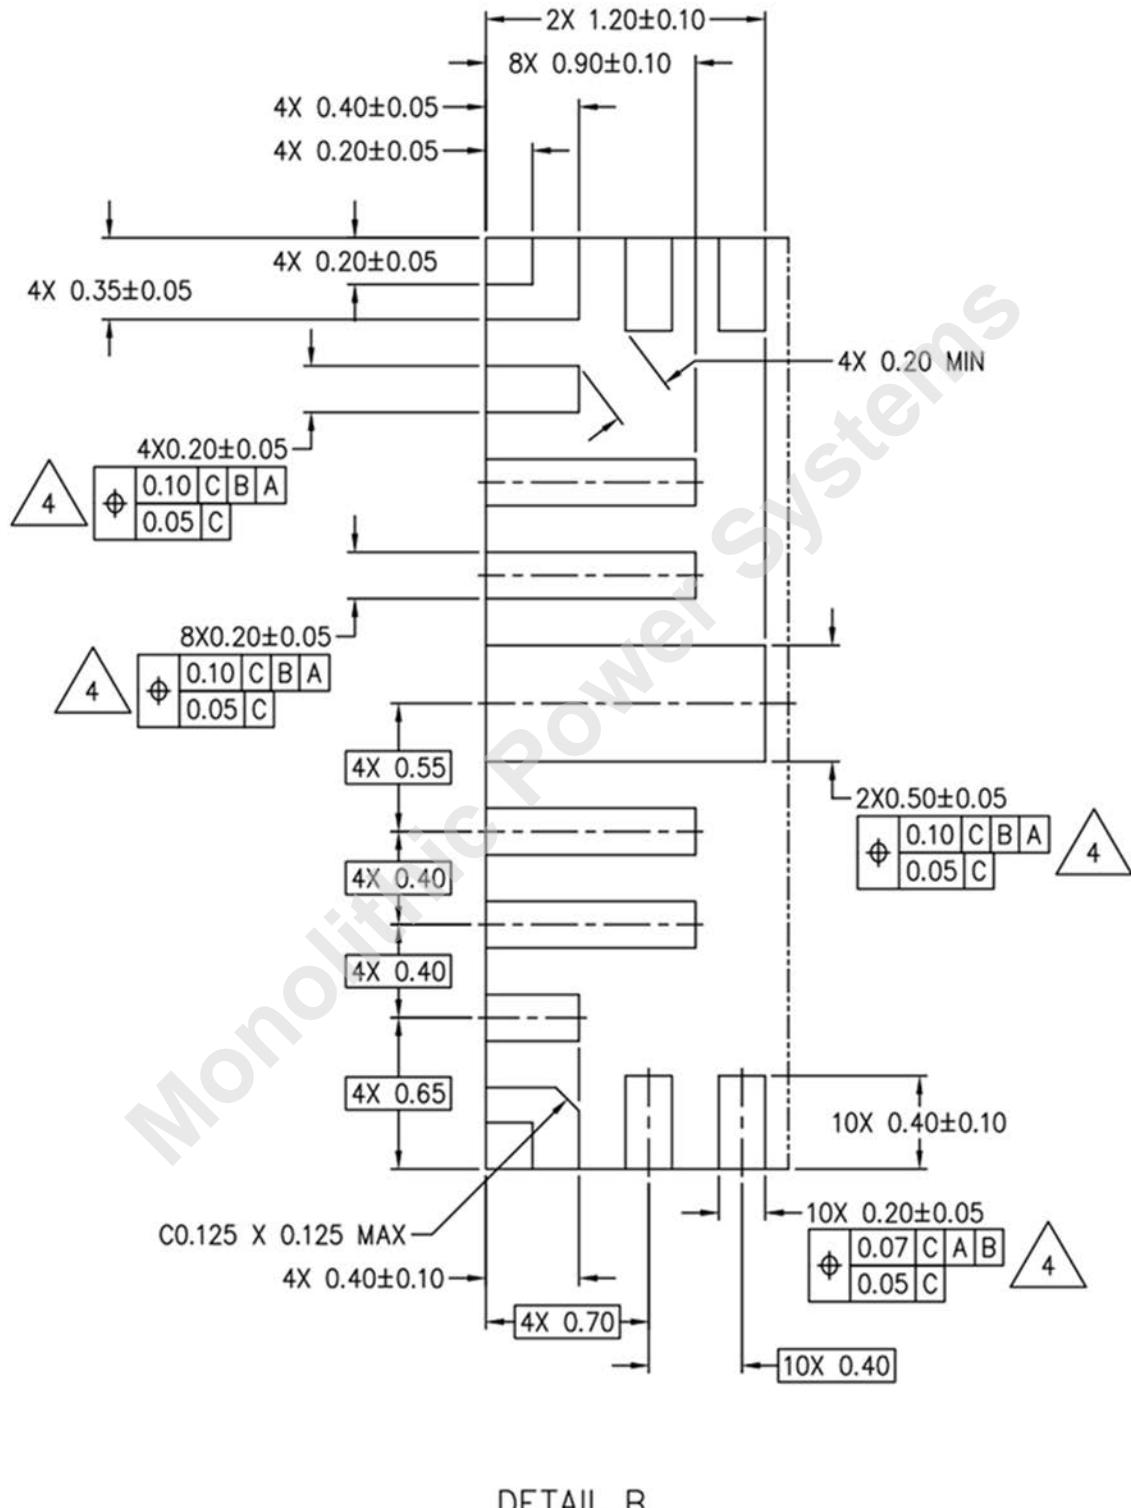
QFN Package Mechanical Drawing - Detail Dimensions
